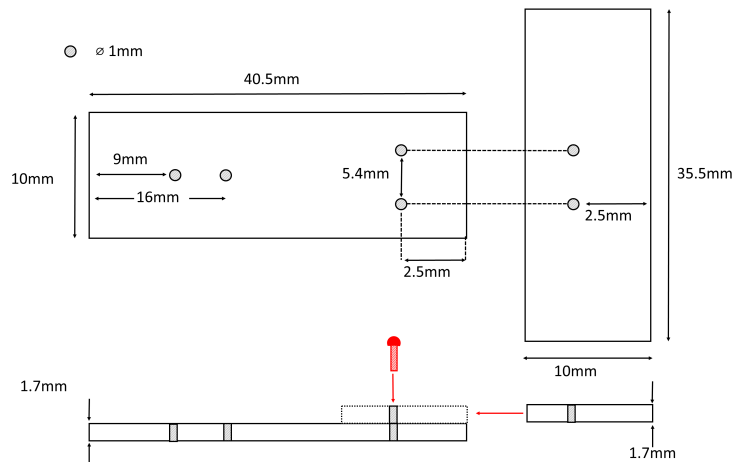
A clamp installed on each of the two motors, used to hold each end of the PDMS strip. The side-clamp used to hold the glass slide beneath the PDMS strip is fixed to the wide section of this clamp.
